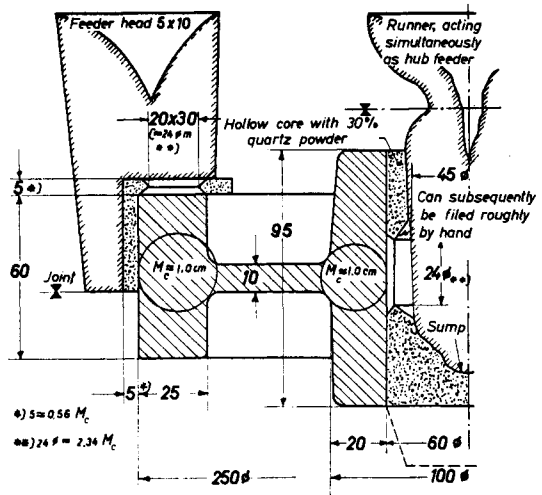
Spur gear wheel with internal feeder at the hub, 3 rim feeders with Washburn cores and heating pads.
